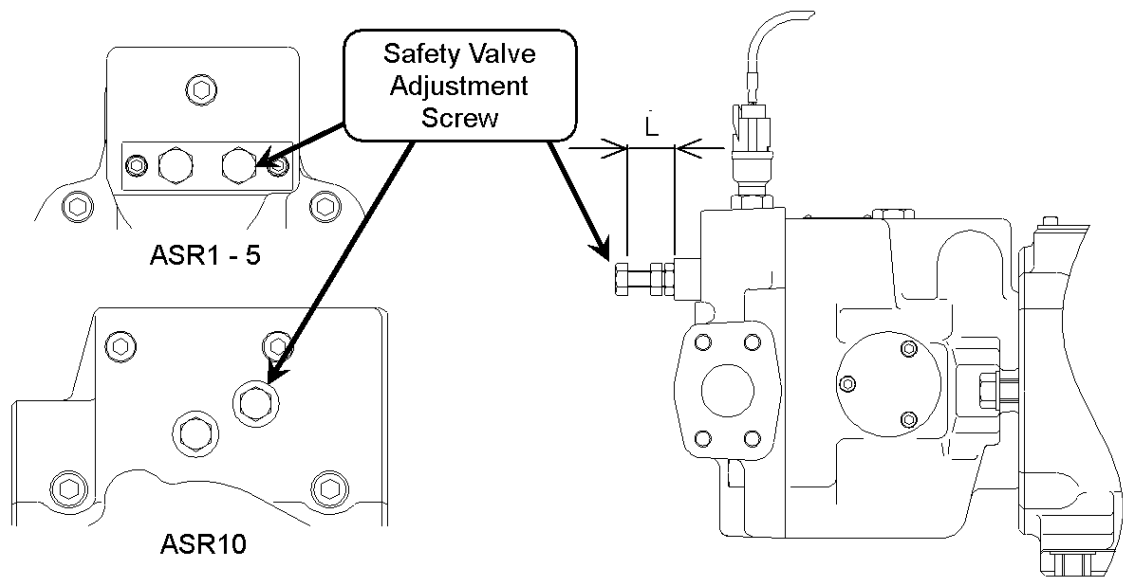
Safety Valve Adjustment/Dimension Measurement
